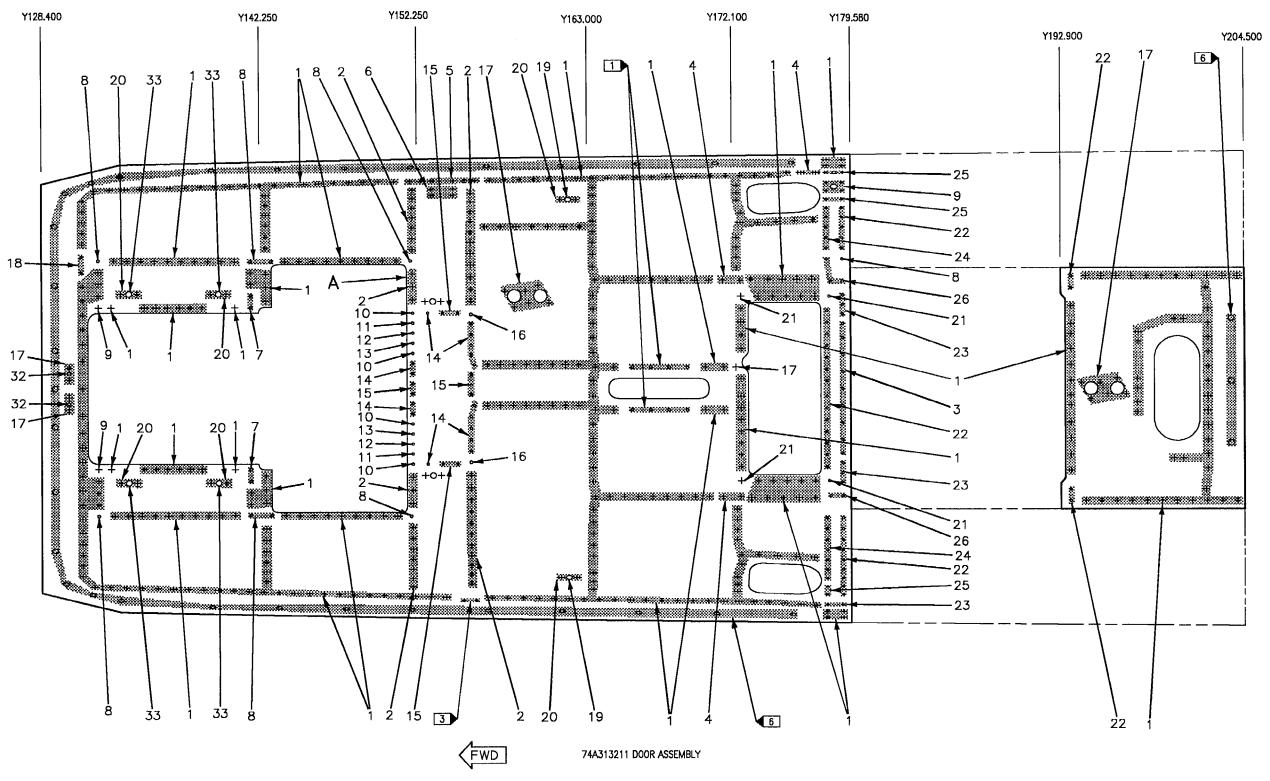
Skin, 74A313055, Fastener Index (Sheet 1)
